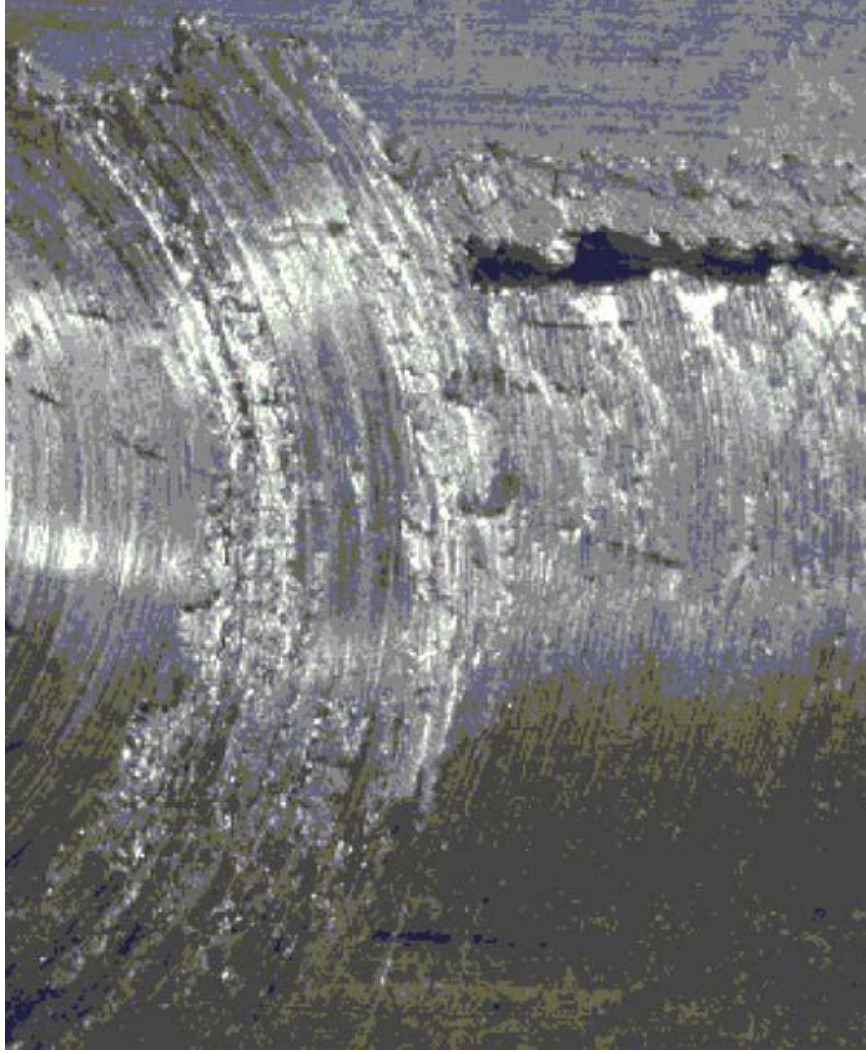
A weld run with lack of penetration [Sinha et al., 2006]
